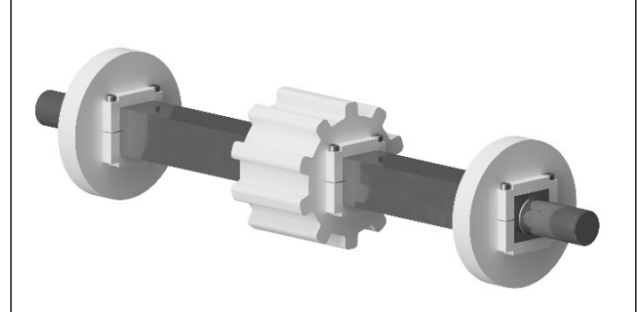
DRIVE SHAFT WITH CENTRAL LUG SPROCKETS
